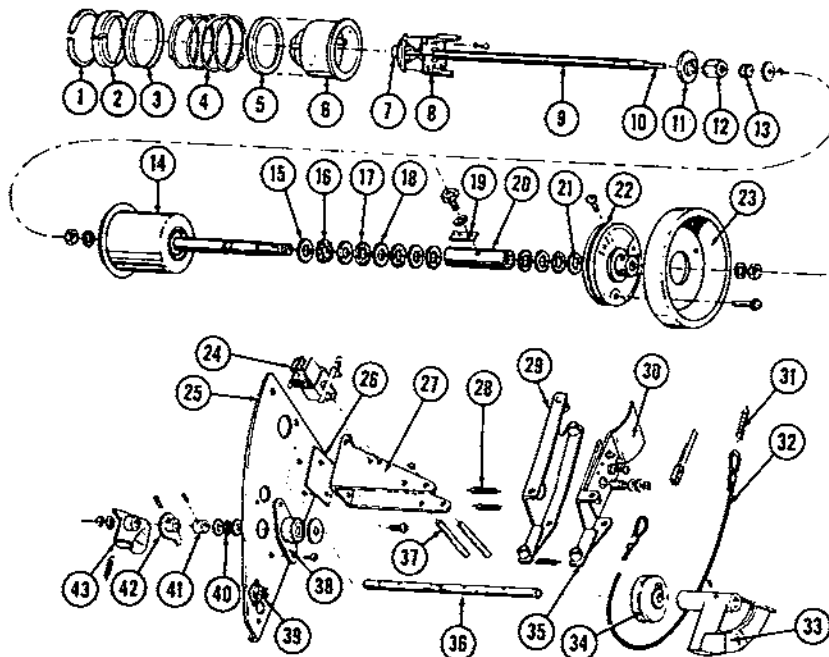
TURNTABLE ASSEMBLY AND MOUNTING PLATE AND SHAFT ASSEMBLY
